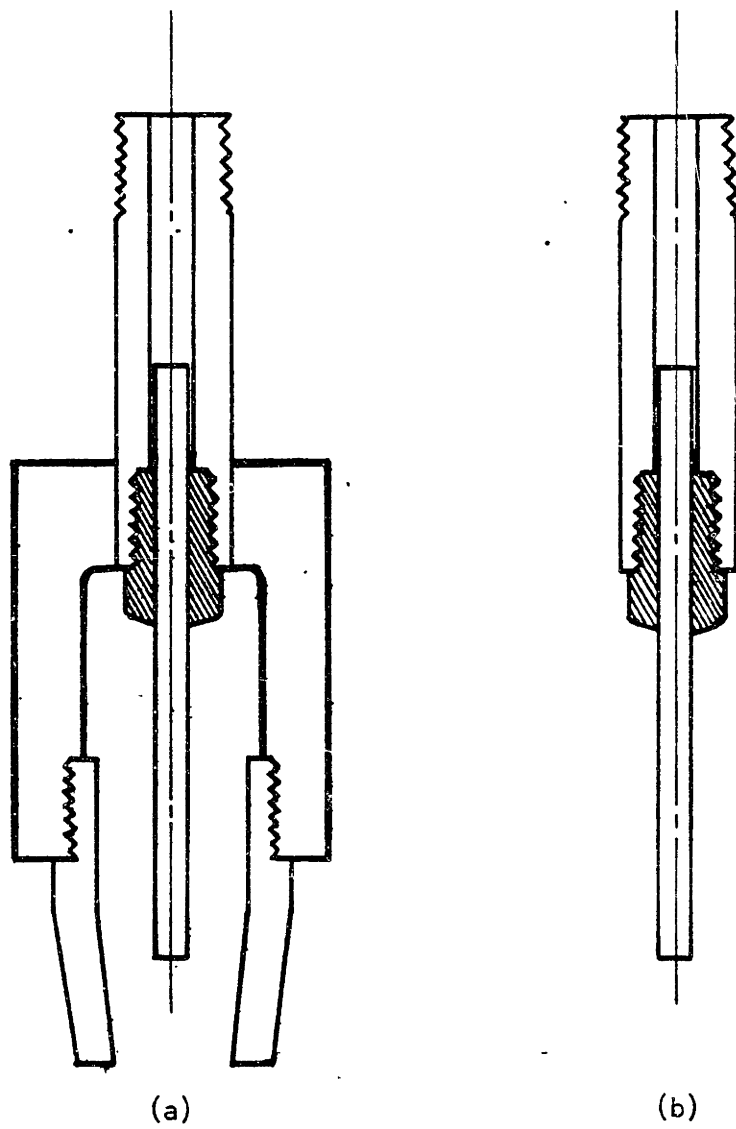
Drawings of GMA welding torch with (a) and without (b) gas cup.
